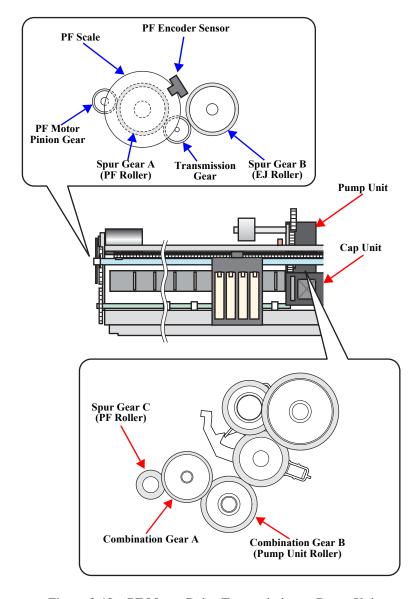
PF Motor Drive Transmission to Pump Unit
